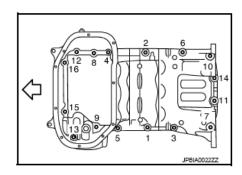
Oil Pan Mounting Bolts Tightening Sequence (Upper) Courtesy of NISSAN MOTOR CO., U.S.A.
